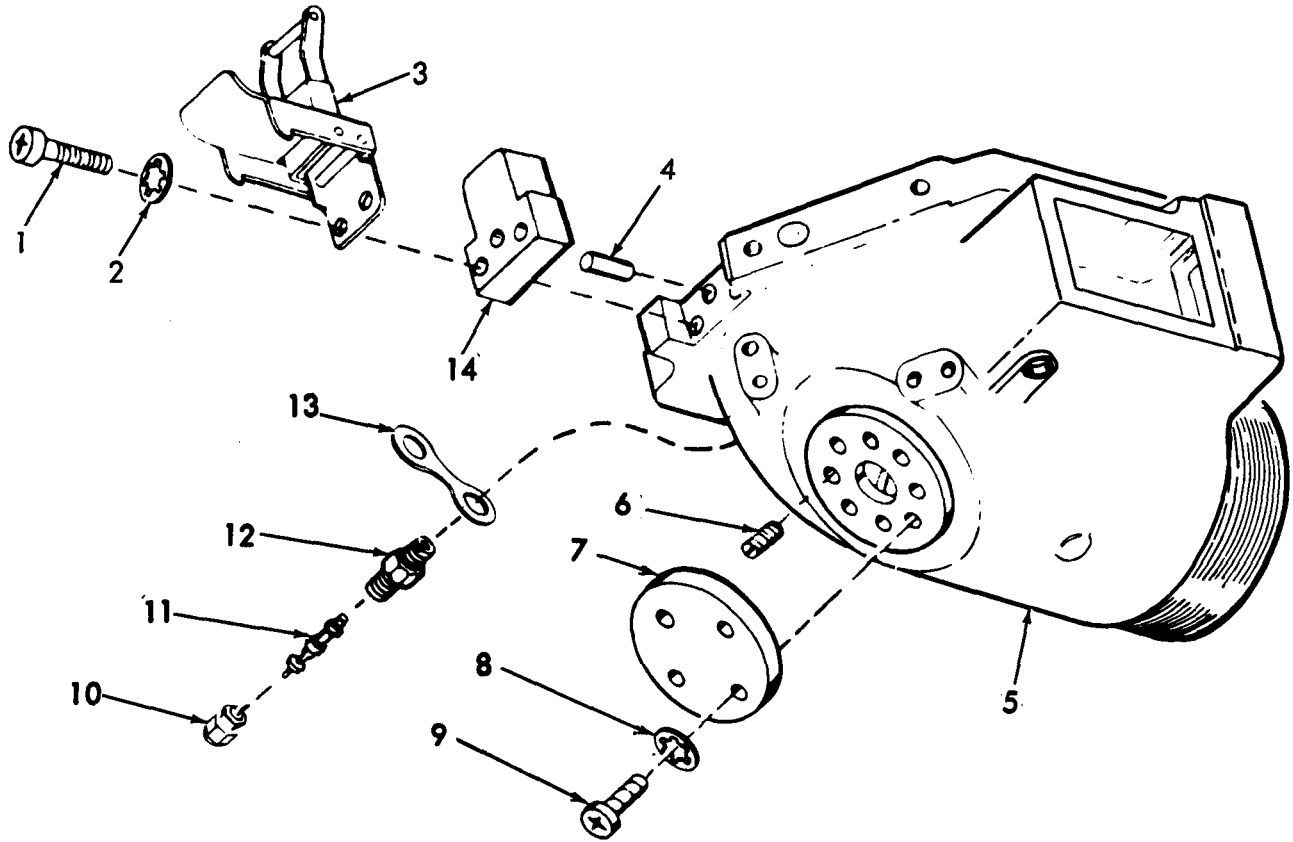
Elbow assembly (passive) 11733401 (partial view-bottom)
